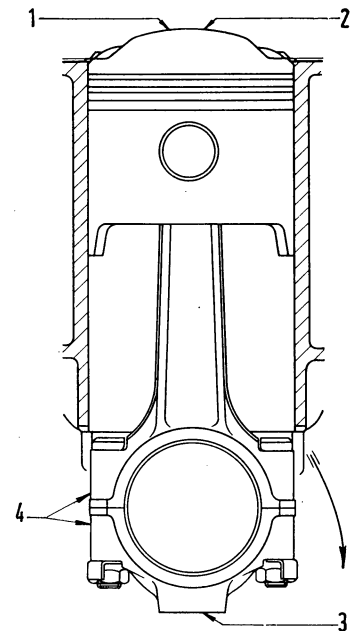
Installation diagram of 118 B.000 engine connecting rod-piston-pin assembly.
